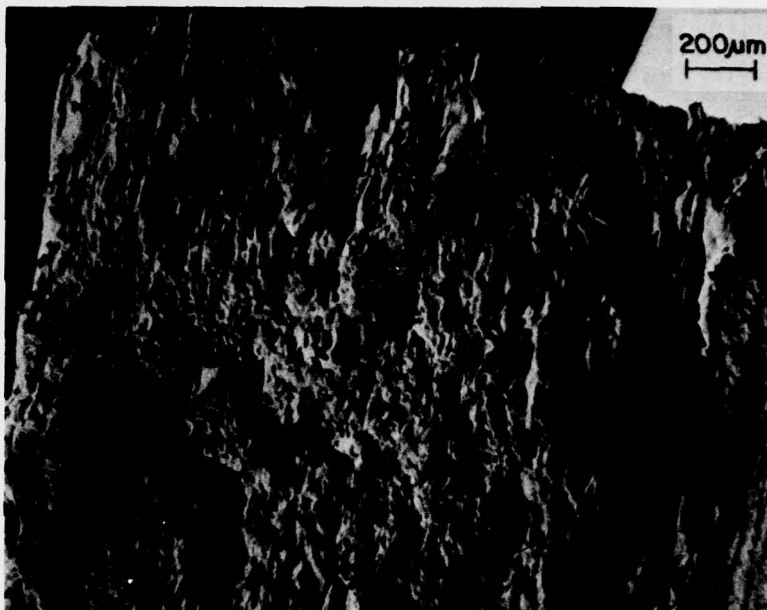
Woody fracture surface typical of wrought iron.
